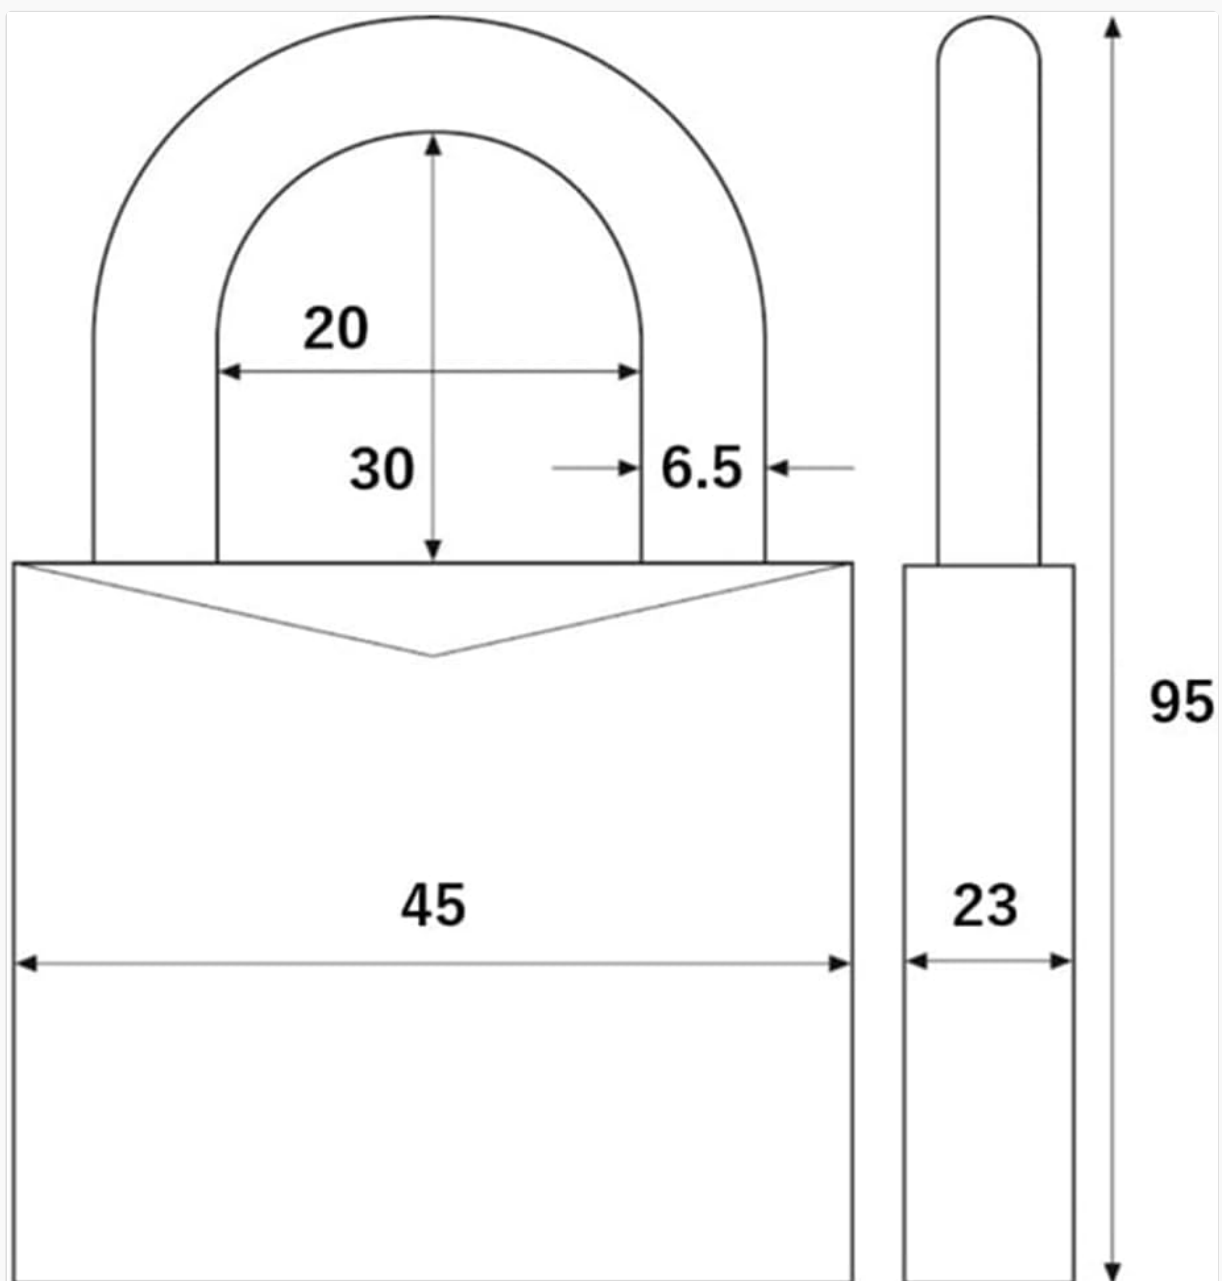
Technical drawing illustrating the dimensions of the ABUS Touch 57/45 Fingerprint Lock in millimeters.
